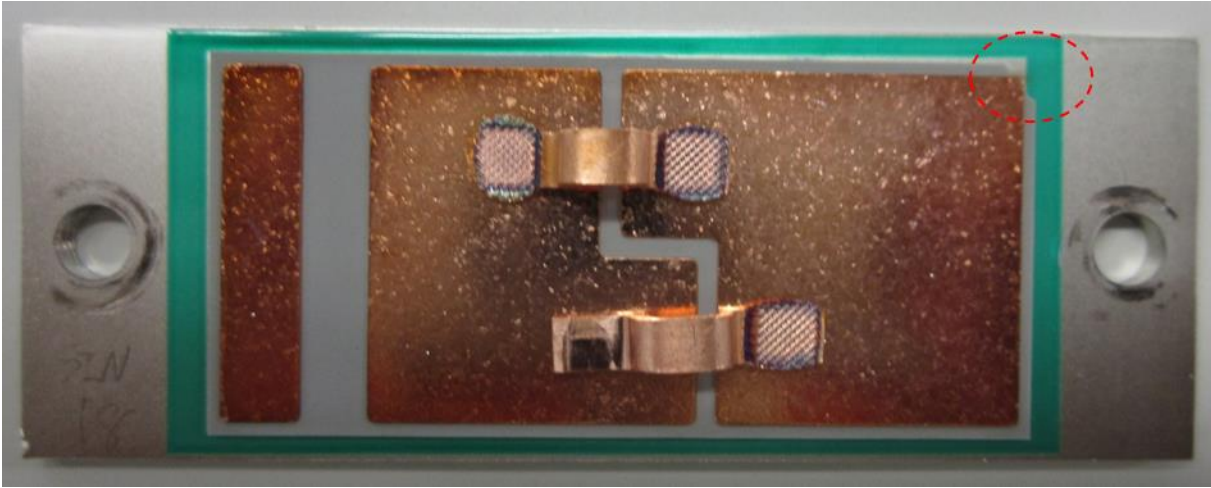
Si₃N₄ substrate destruction during ultrasonic welding.
